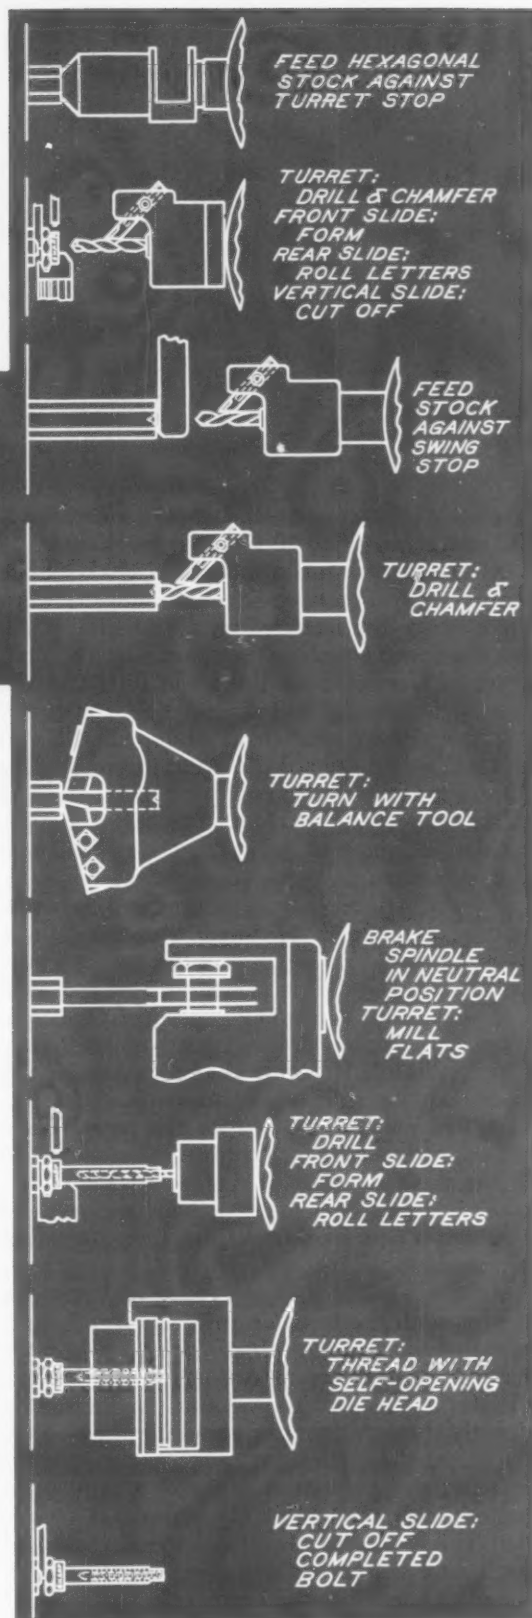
Schematic layout of tooling used to produce bolt and mating nut in same automatic cycle. Nut is produced first, with the part being drilled, chamfered, formed, lettered, and cut-off as seen at the right. Then the nut is transferred to an attachment (shown below) for chamfering and tapping.
